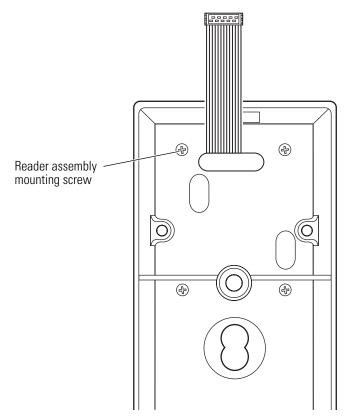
Removing and reinstalling the screws for the B.A.S.I.S. dual validation reader assembly
